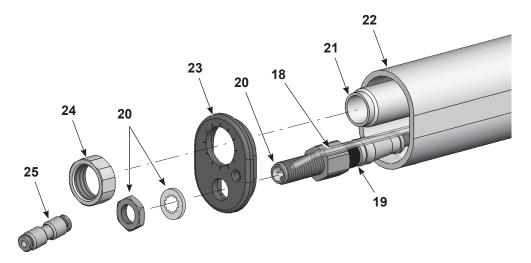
Tube-Mount Gun Disassembly 1 of 5
